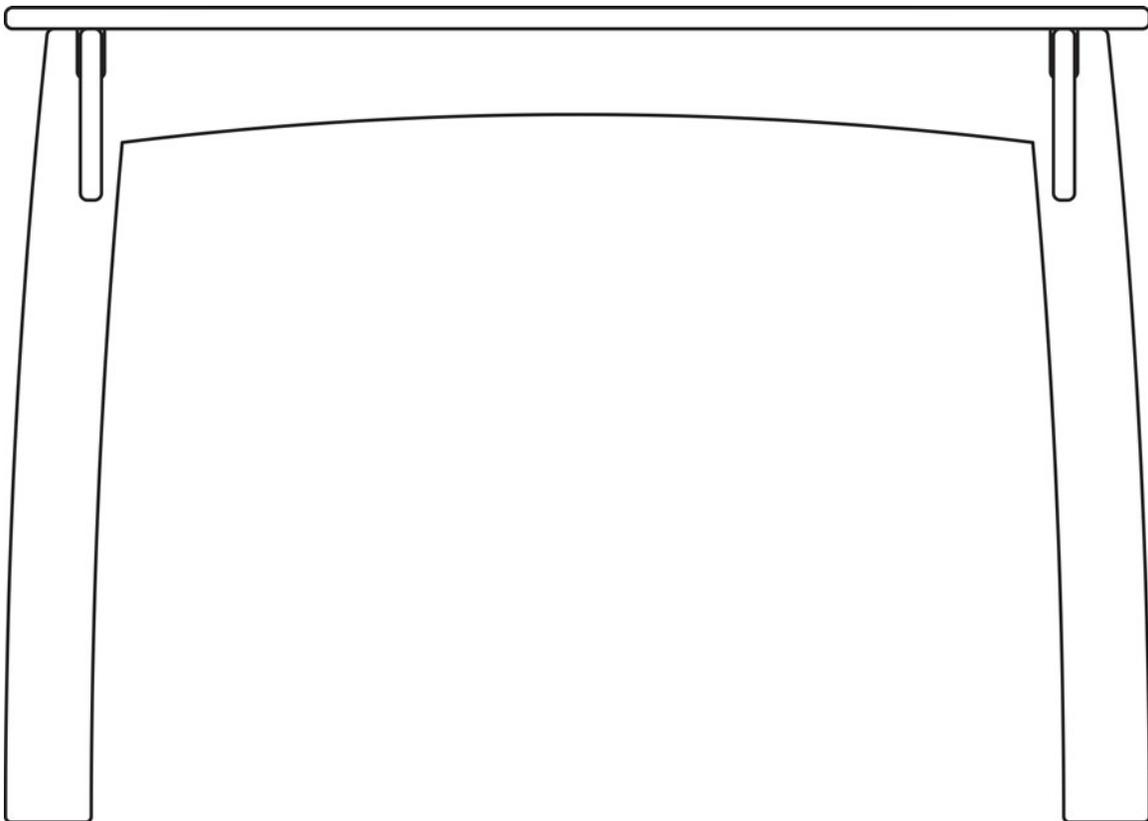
Shu Wun Chan. Dining Table. 2013. Drawing (Side view)
